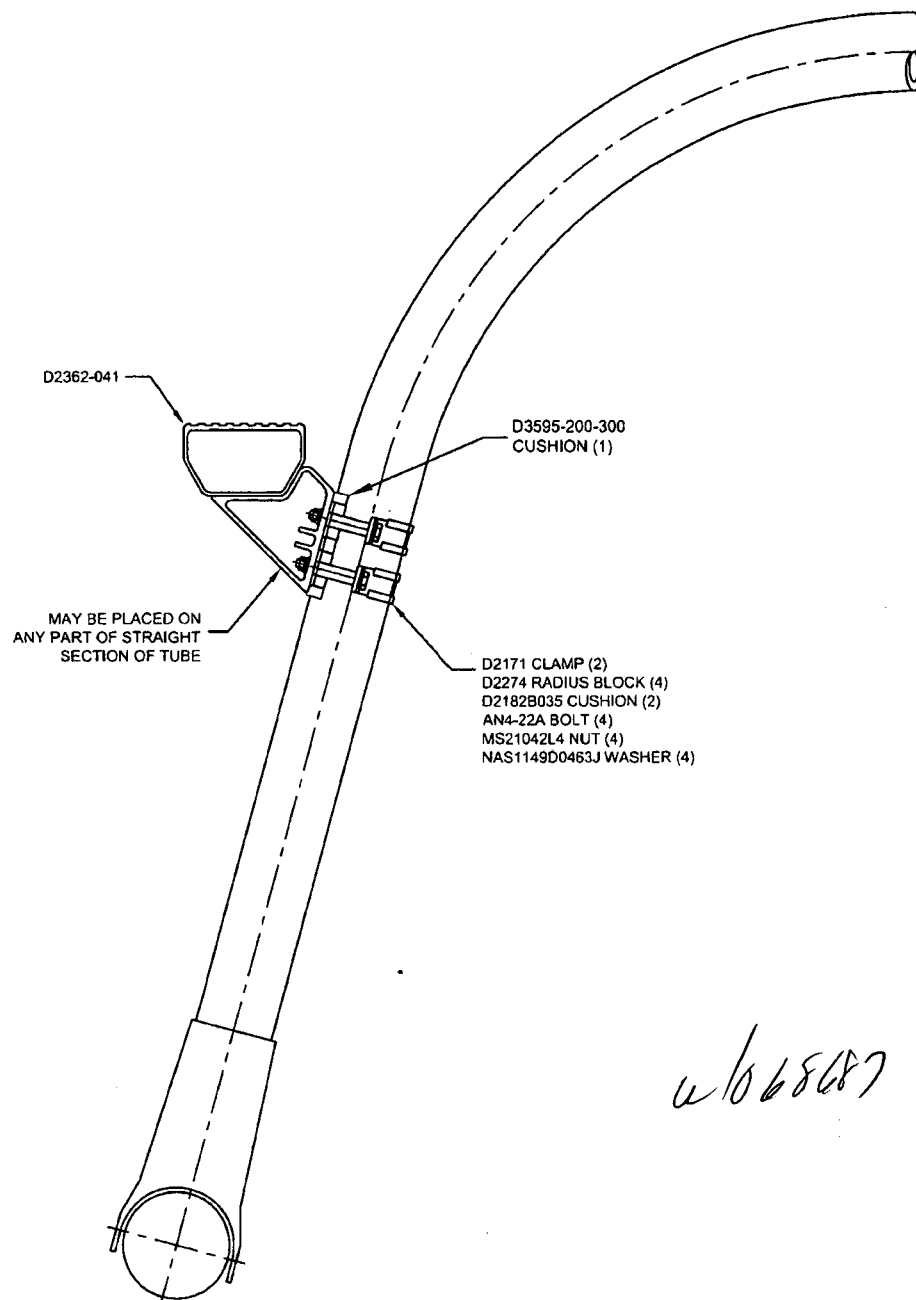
D350-591-117A Heli-Access-Step™, Pre-Flight Step
